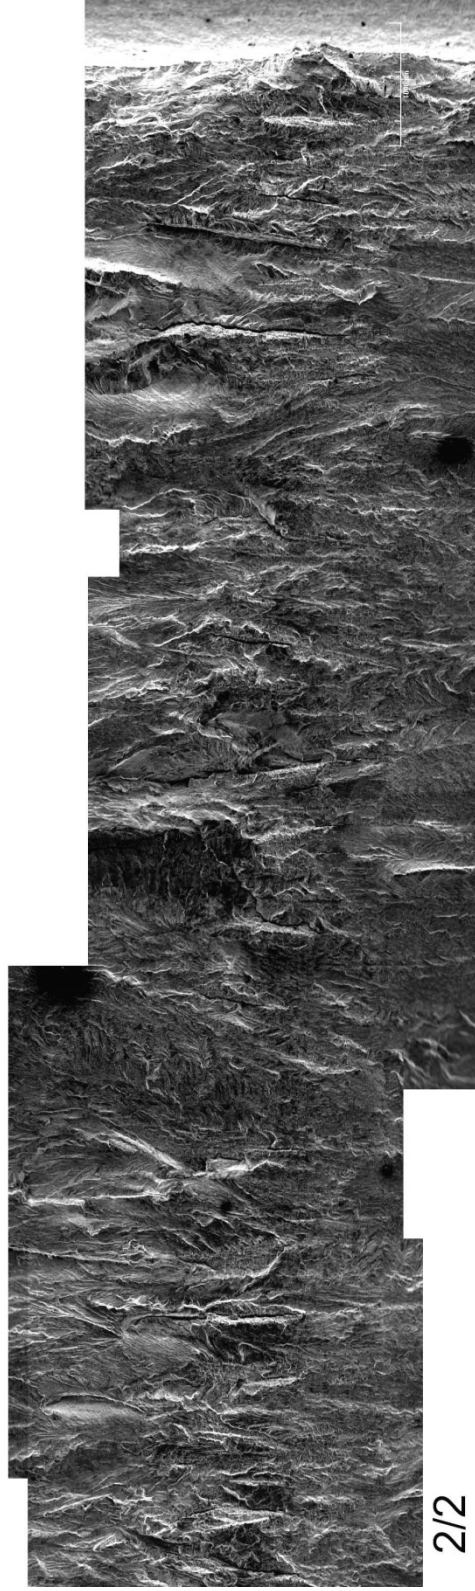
Fracture surface of Specimen A152-TS-5: tested in primary water environment
